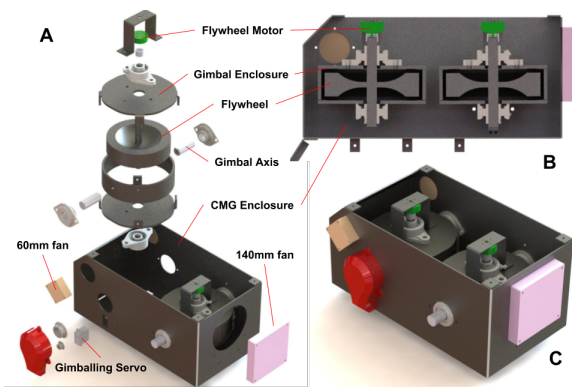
Model of the CMG assembly, view A is the exploded view of the assembly, View B is a section view of the center of the assembly, and View C is the isometric view of the assembly.
